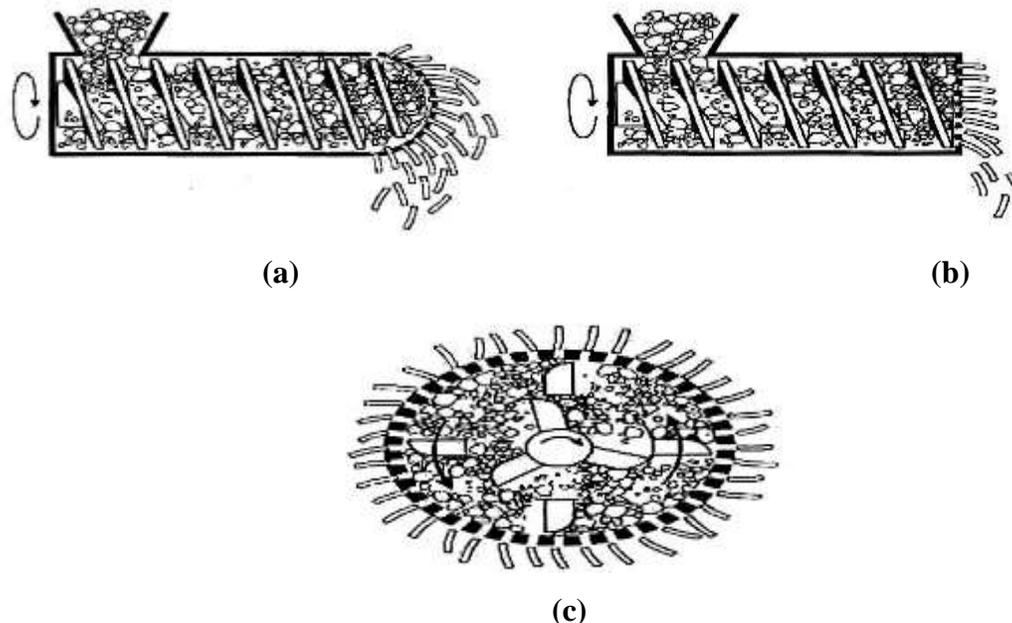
(a) Axial screw feed extruder, (b) Dome screw feed extruder and (c) Radial screw feed extruder.
